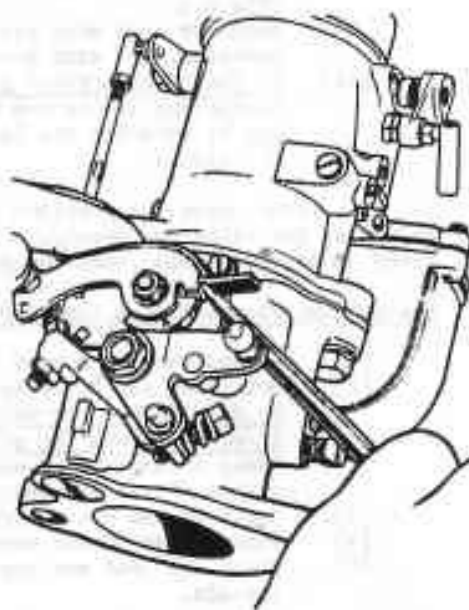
ADJUSTING CAM LEVER STOP TAG.
